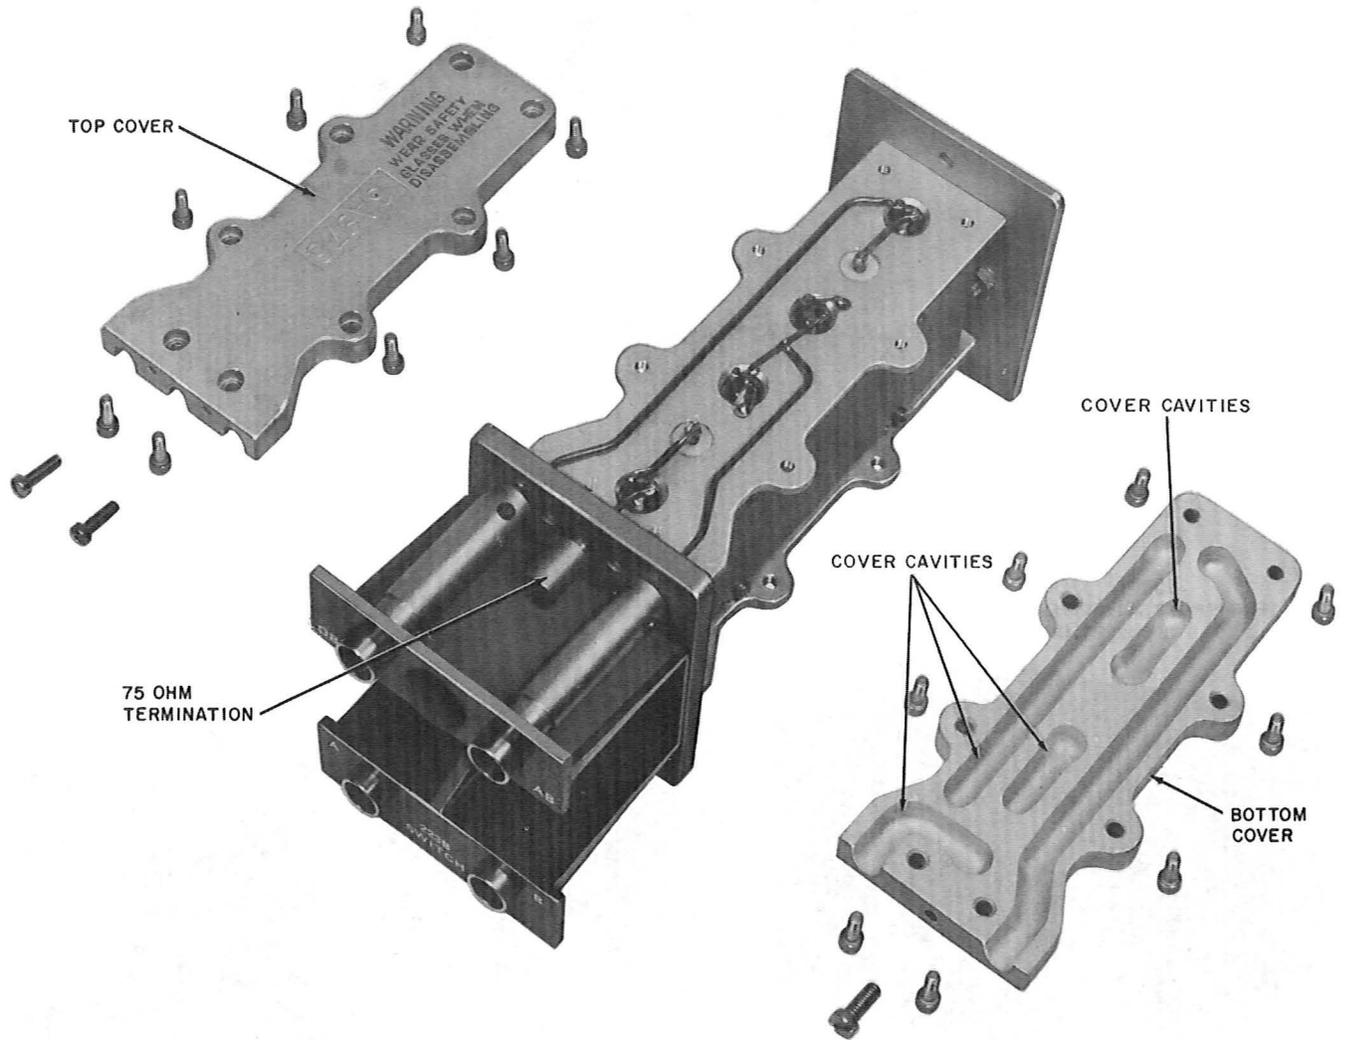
223B Coaxial Switch, Disassembled, Top View
